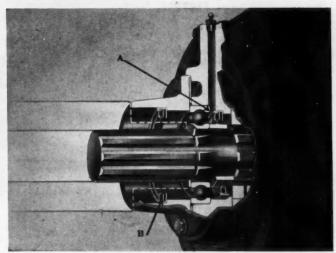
Cut-away drawing of Rear Clutch Bearing.
